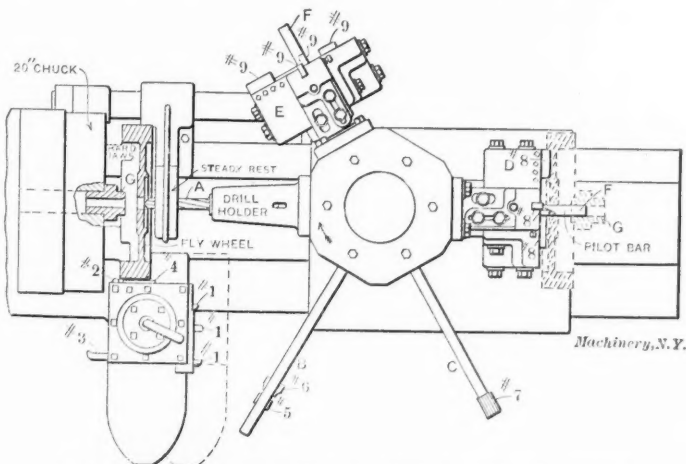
Finishing a Fly-wheel in the Libby Turret Lathe. Second part of First Operation.
